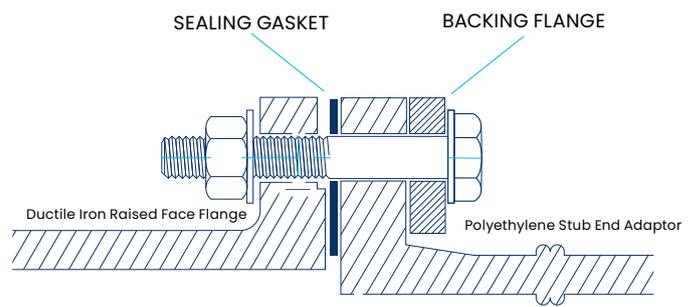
Ductile Iron Raised Face Flange to PE Full Face Adaptor
